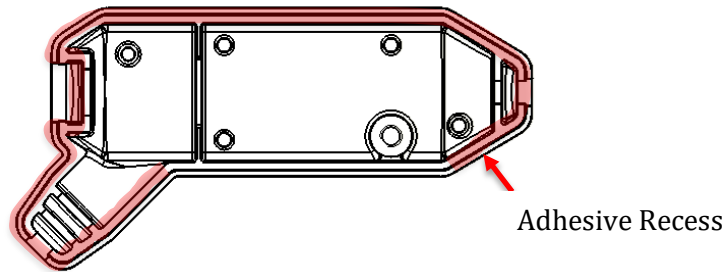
Epoxy adhesive application layout for Housing, Bridgeboard, Bottom Shell
